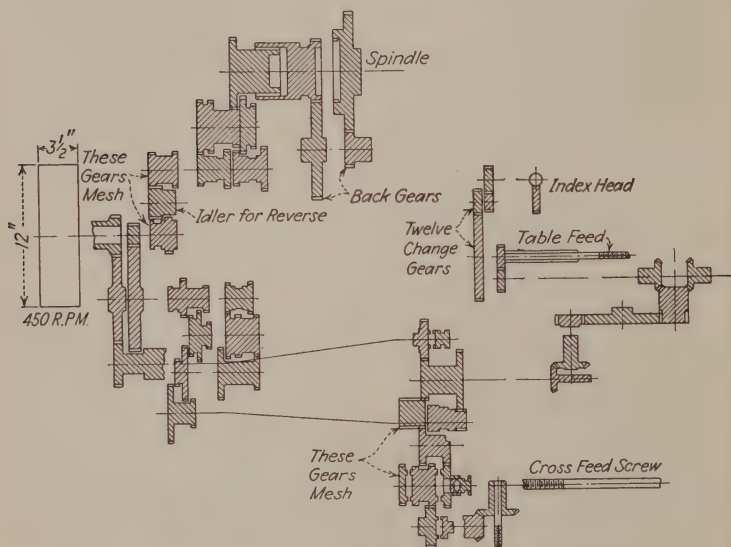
Diagram of gears in Brown & Sharpe universal milling machine.
